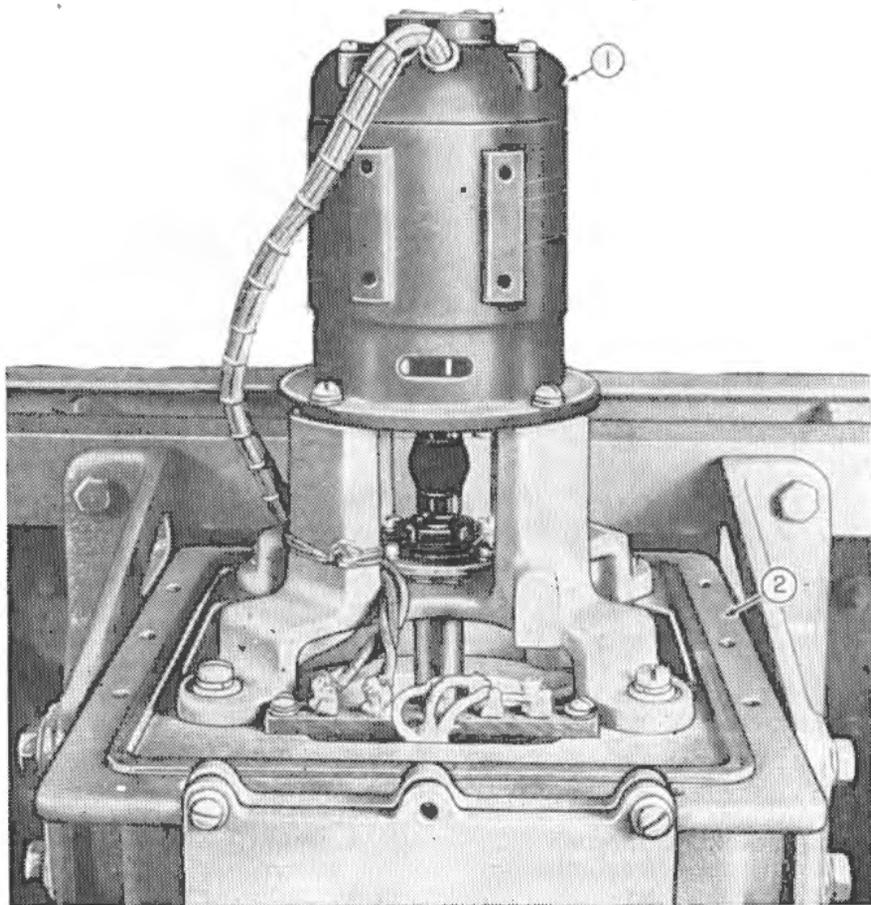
Lobe-switching mechanism (gas-tight cover removed).
